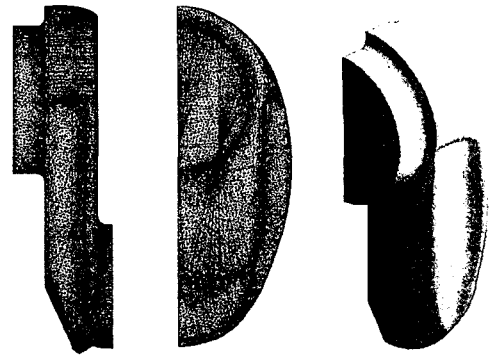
(a) Analysis result of crank throw "B" forged by the proposed closed-die forging equipment
